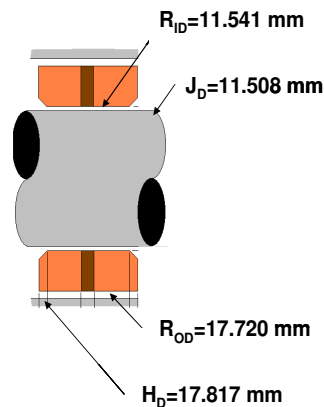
Compressor side FRB dimensions after testing (August 2005)
